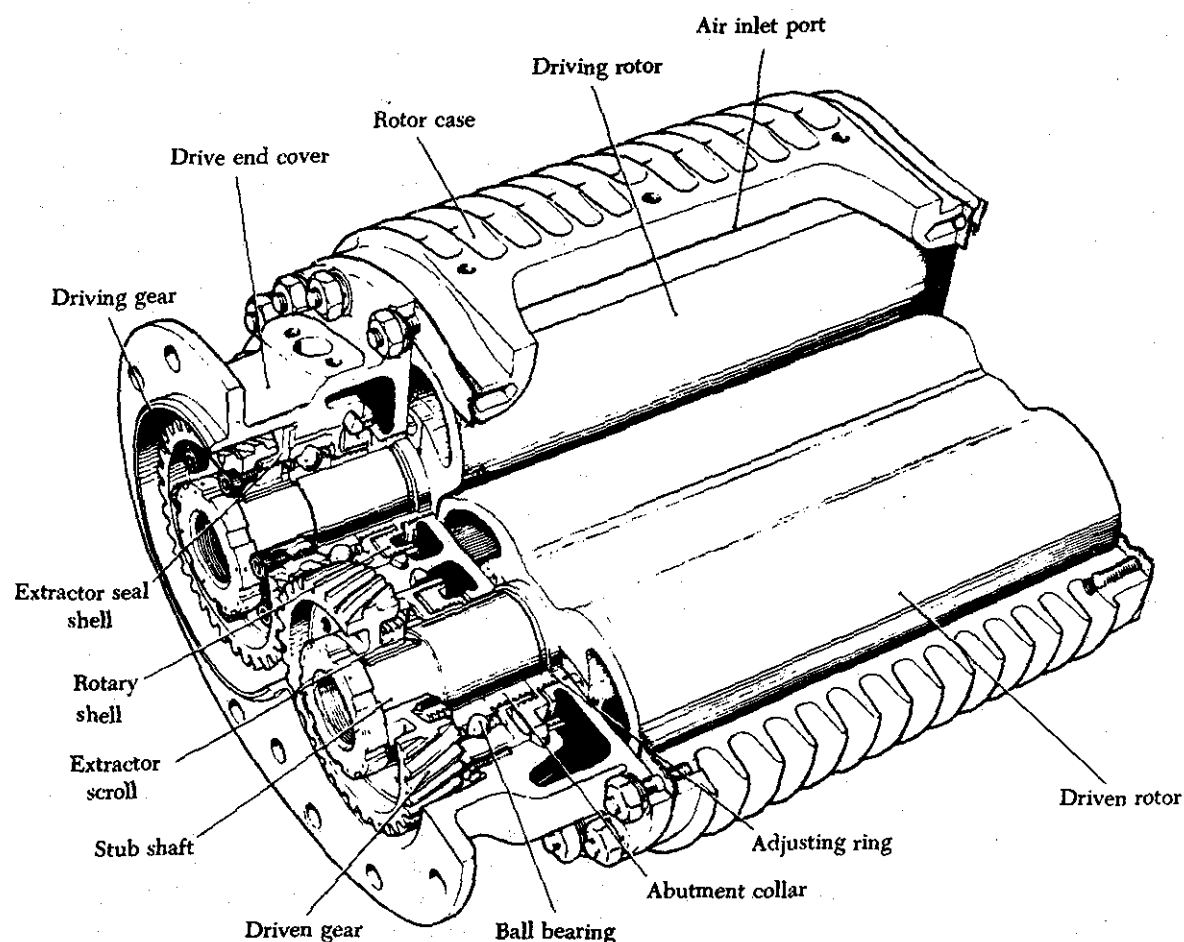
Cutaway view of a Roots-type cabin supercharger.
